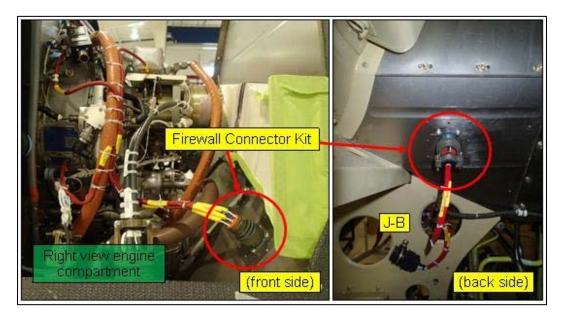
Firewall Connector Kit p/n: TU02929 locate in right side of forward engine firewall refer to drawing: 02929. Alternate p/n: TU03125, drawing: 03125.
